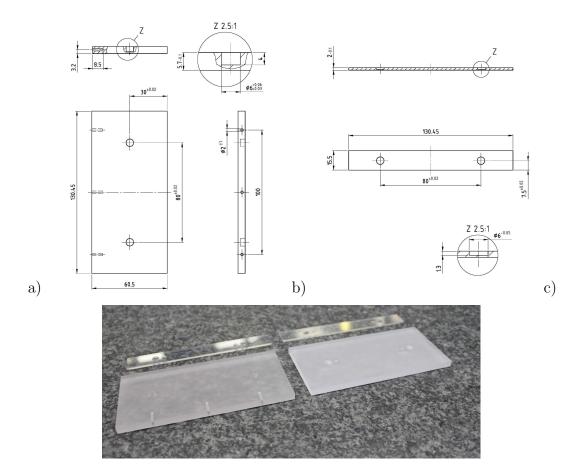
A drawing of the endpiece a) on readout side and b) on mirror side of a fibre mat.c) A photo of the endpiece on readout side and on mirror side of a fibre mat.
